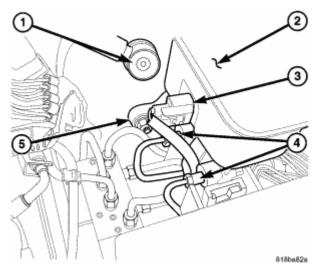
Identifying Reservoir, Fluid Level Electrical Connector, Brake Lines, Mounting Nuts & Booster Check Valve Courtesy of CHRYSLER LLC
